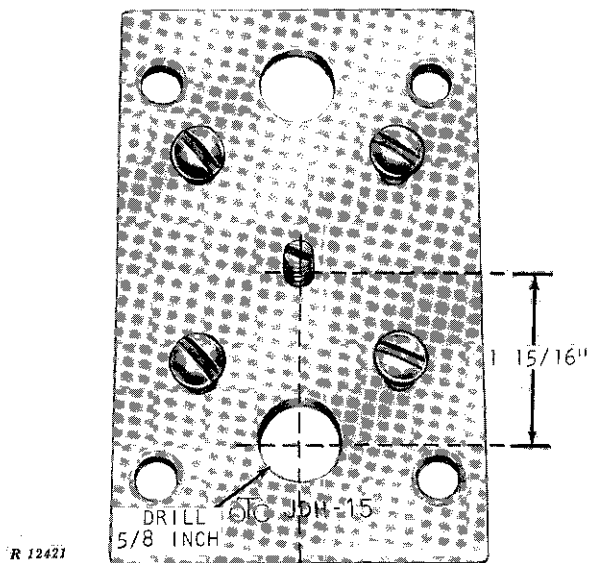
Adjusting Plate JDH-15—Altered
